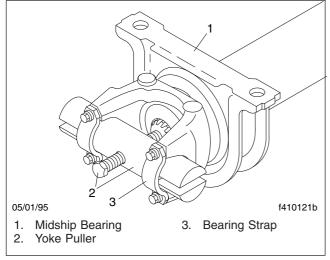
, Remove a Half-Round End-Yoke from a Coupling Shaft
